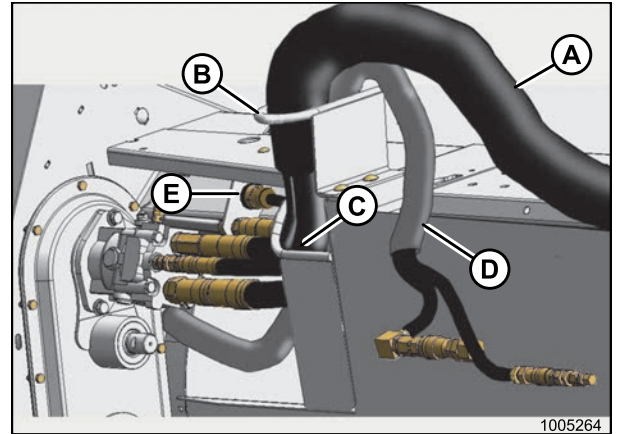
Hose and Electrical Bundle – 14-Ft. and 16-Ft. Header Shown (18-Ft. Similar)
